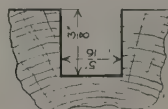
Ring Fixtures for Open Grooves,  $\frac{3}{8}$  in. by  $\frac{3}{8}$  in., Without Pinch Handles.
